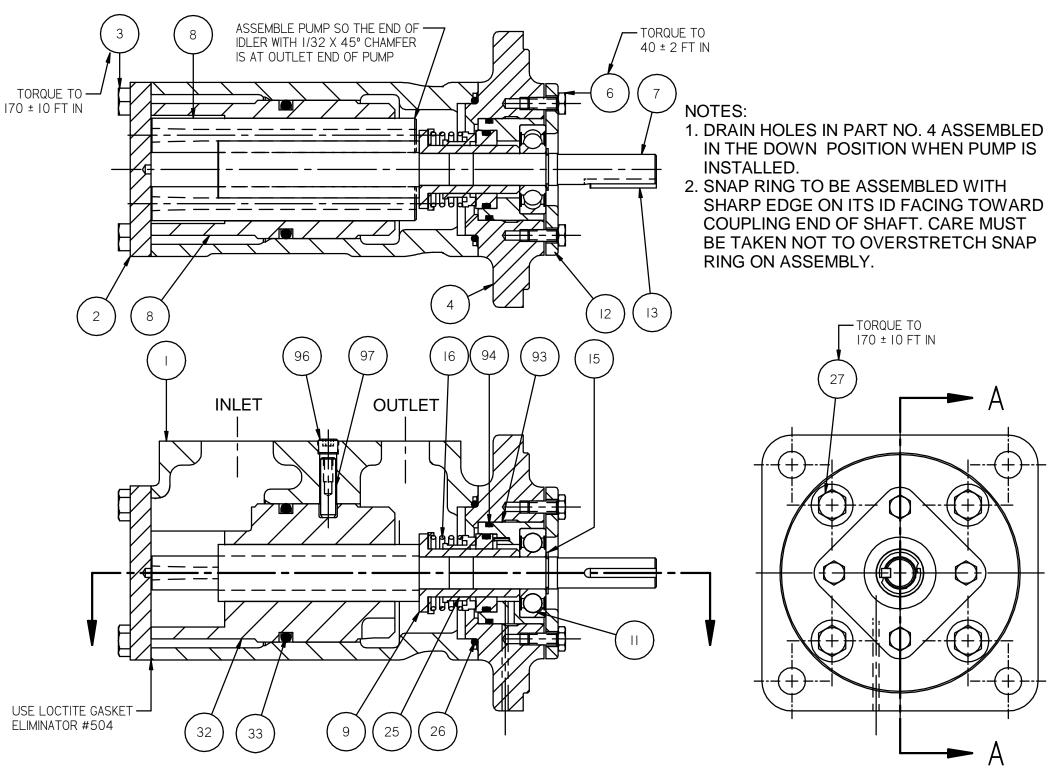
STEEL CASE C-FACE MOUNT ASSEMBLY
